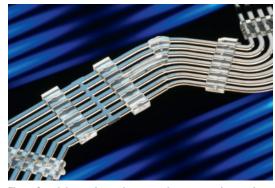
Gas tight mechatronic composite parts made out of metal and polymer can be manufactured in two steps using Ultramid Seal-Fit in a simple injection molding process
